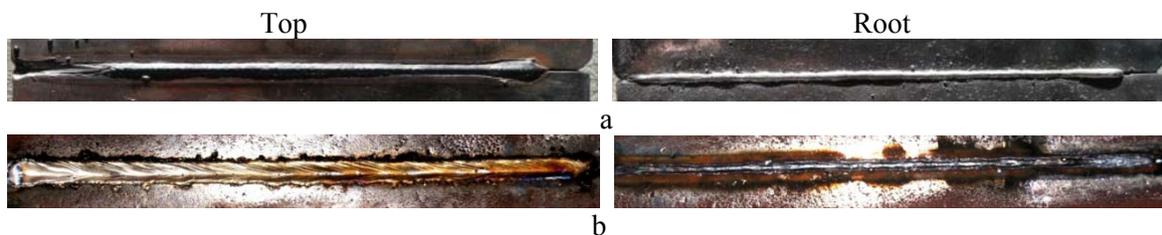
The appearance of the welds: a - Hardox 450; b - Hardox 400.
